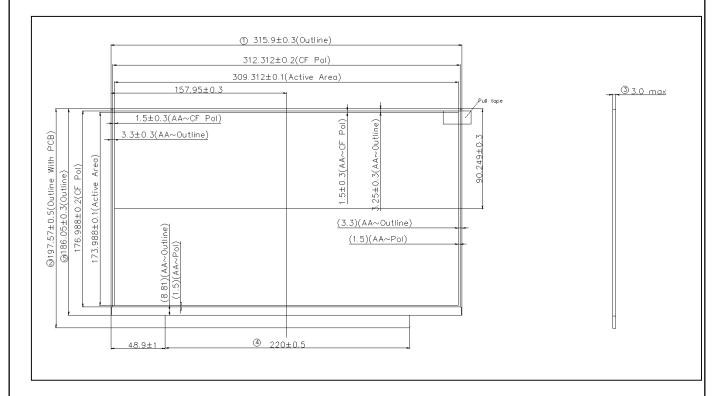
TFT-LCD Module Outline Dimension (Front View)
